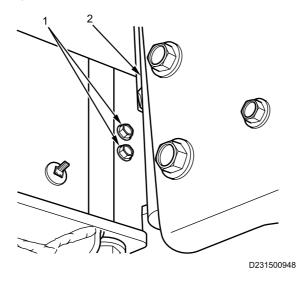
Right Harness Support Bracket Frame Brace Bolts.
